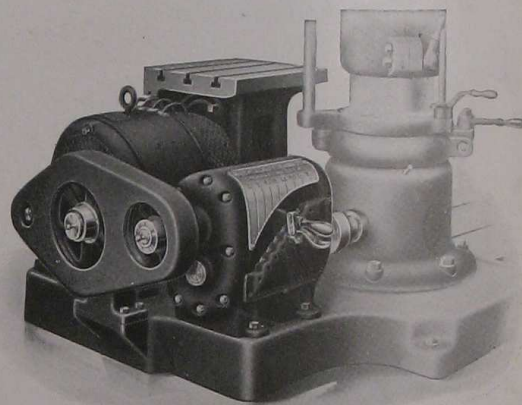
Constant Speed Motor Drive thru Speed Box.
